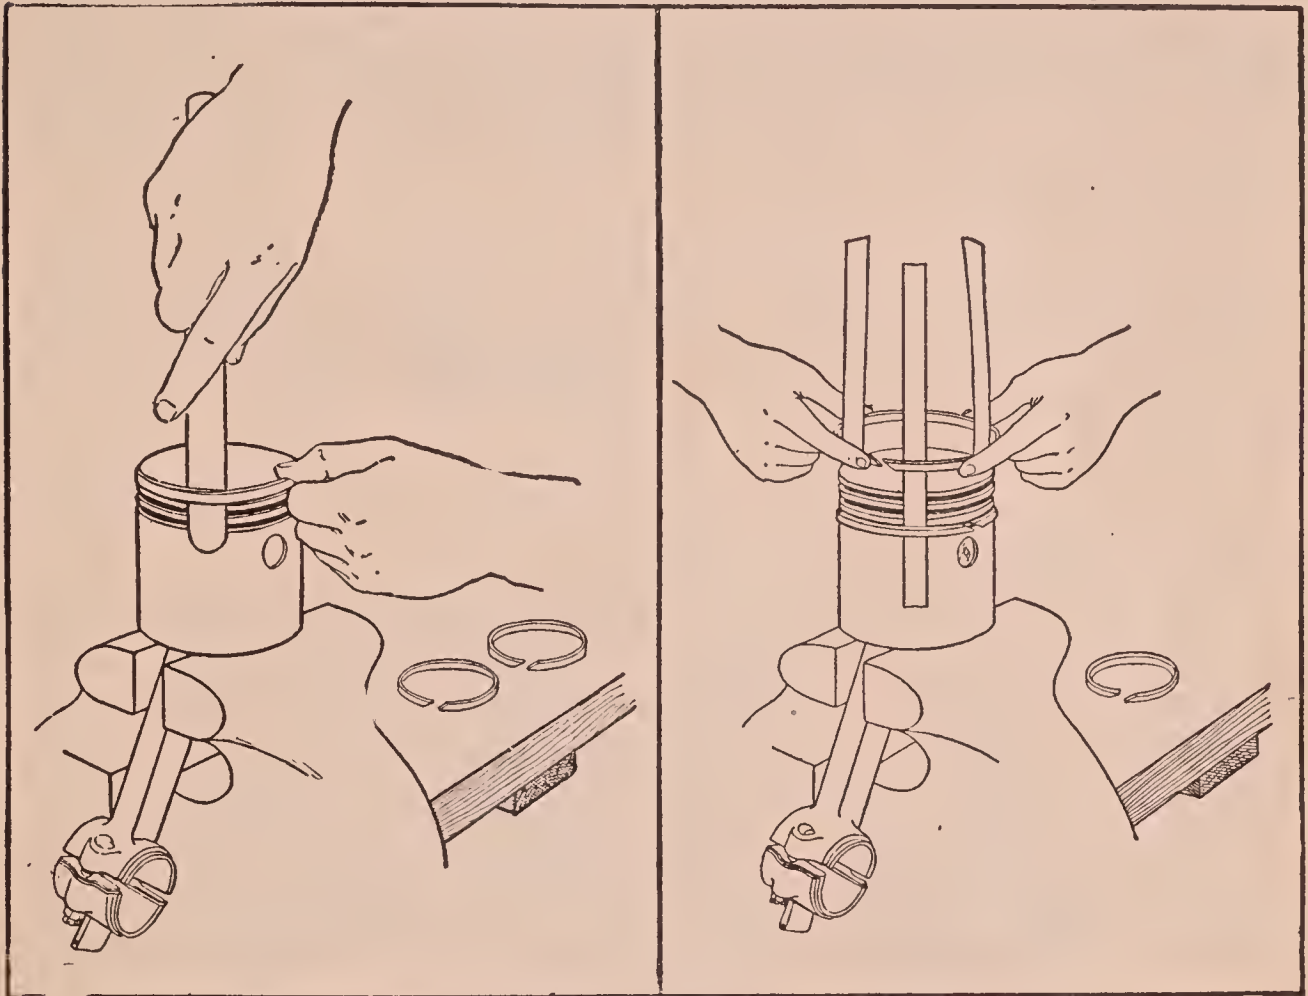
Left—Removing Piston Rings Right—Installing Piston Rings
